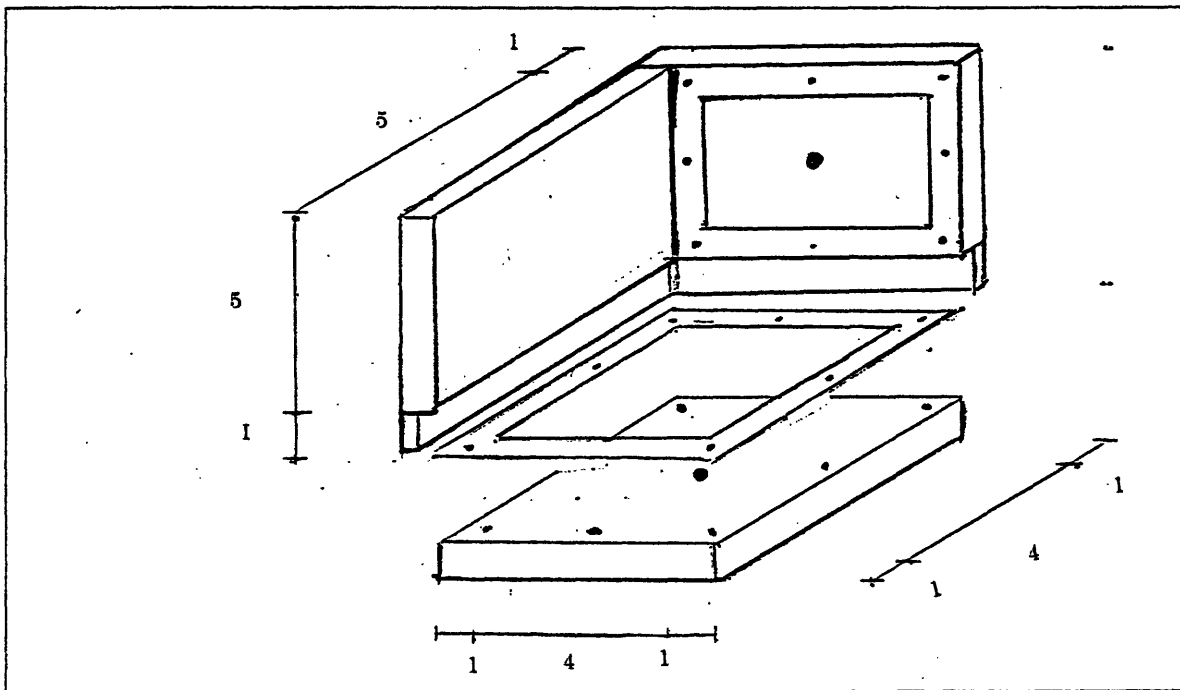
An exploded view of the testing apparatus showing the input holes, sealing collars, gaskets and bolts.
